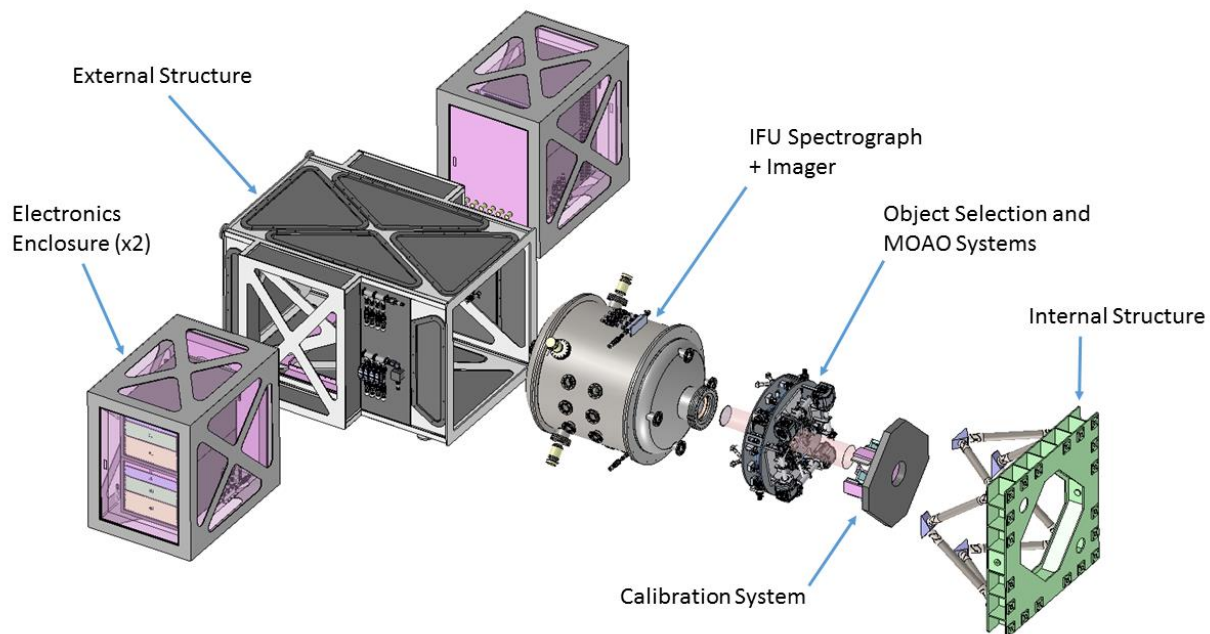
GIRMOS overall instrument mechanical design (exploded view)
